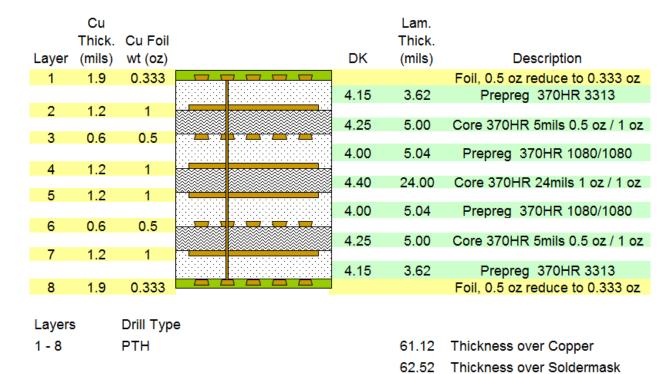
Vybrid Tower module stackup drawing from PCB-fabrication company
